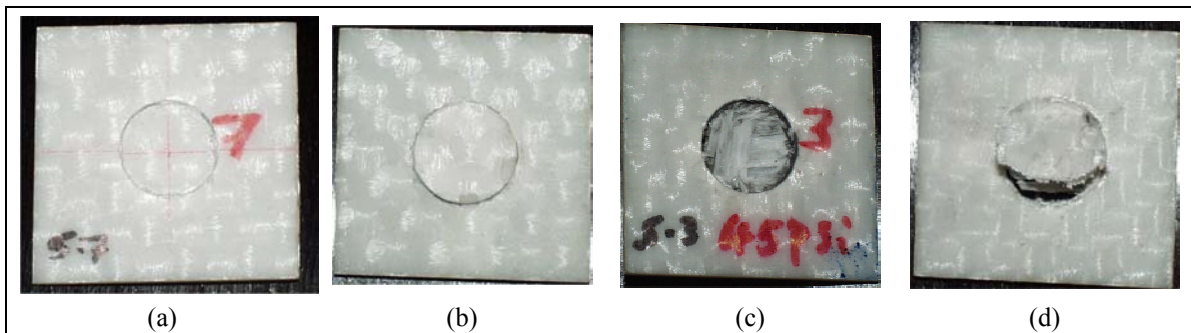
Plain weave specimens after dynamic punch: (a) and (b) show front and rear surfaces of one specimen after low-speed punch; (c) and (d) show front and rear surfaces of one specimen after high-speed punch.
